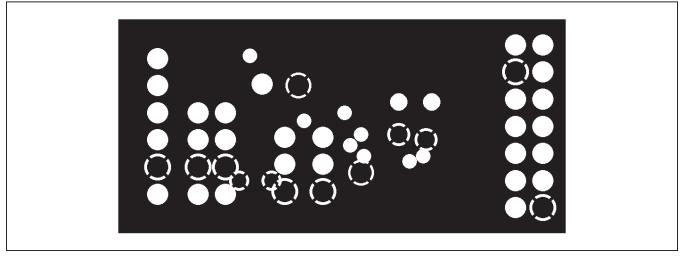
MAX5825PMB11 Peripheral Module PCB Layout—Inner Layer 1 (Ground)
